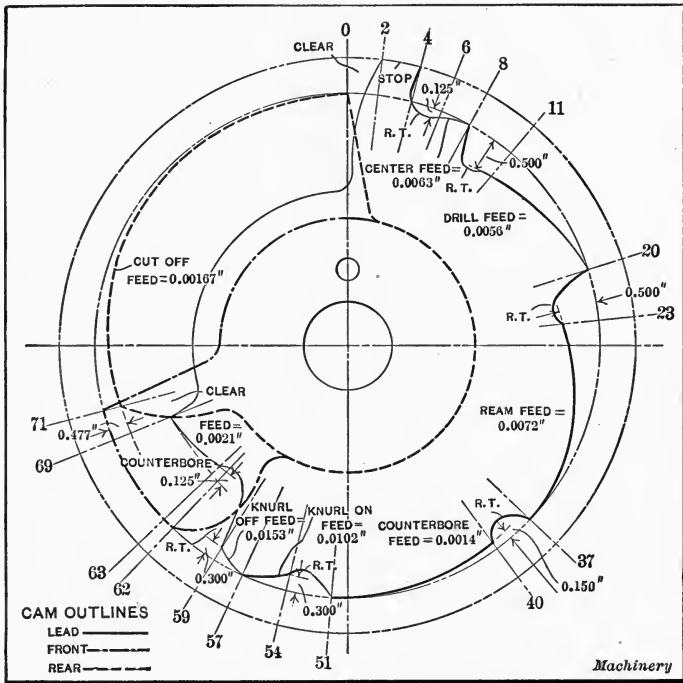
Cams used in Producing the Piece shown at *A* in Fig. 7
